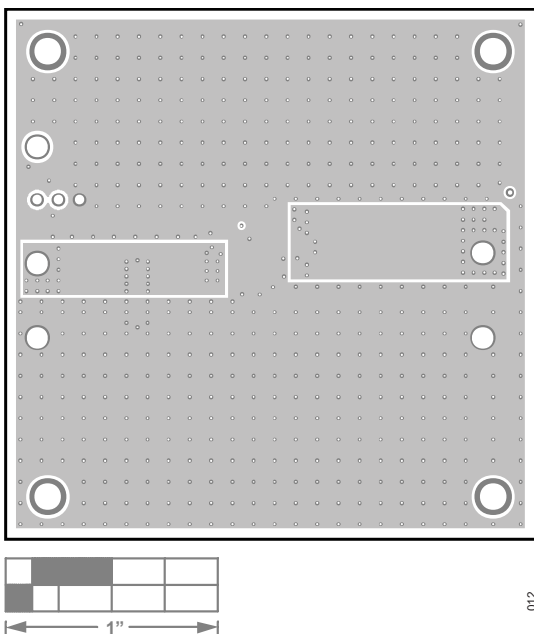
EVAL-ADPL21504-AZ Evaluation Board PCB Layout—Layer 2
